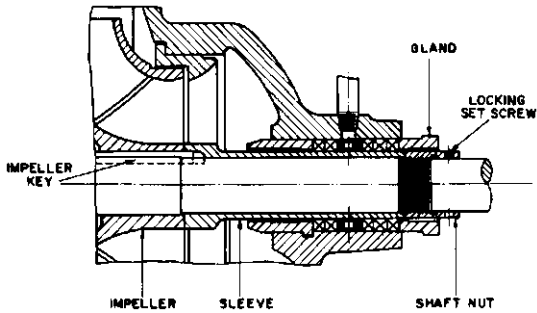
A sleeve with external locknut and impeller key extending into the sleeve to prevent rotation
